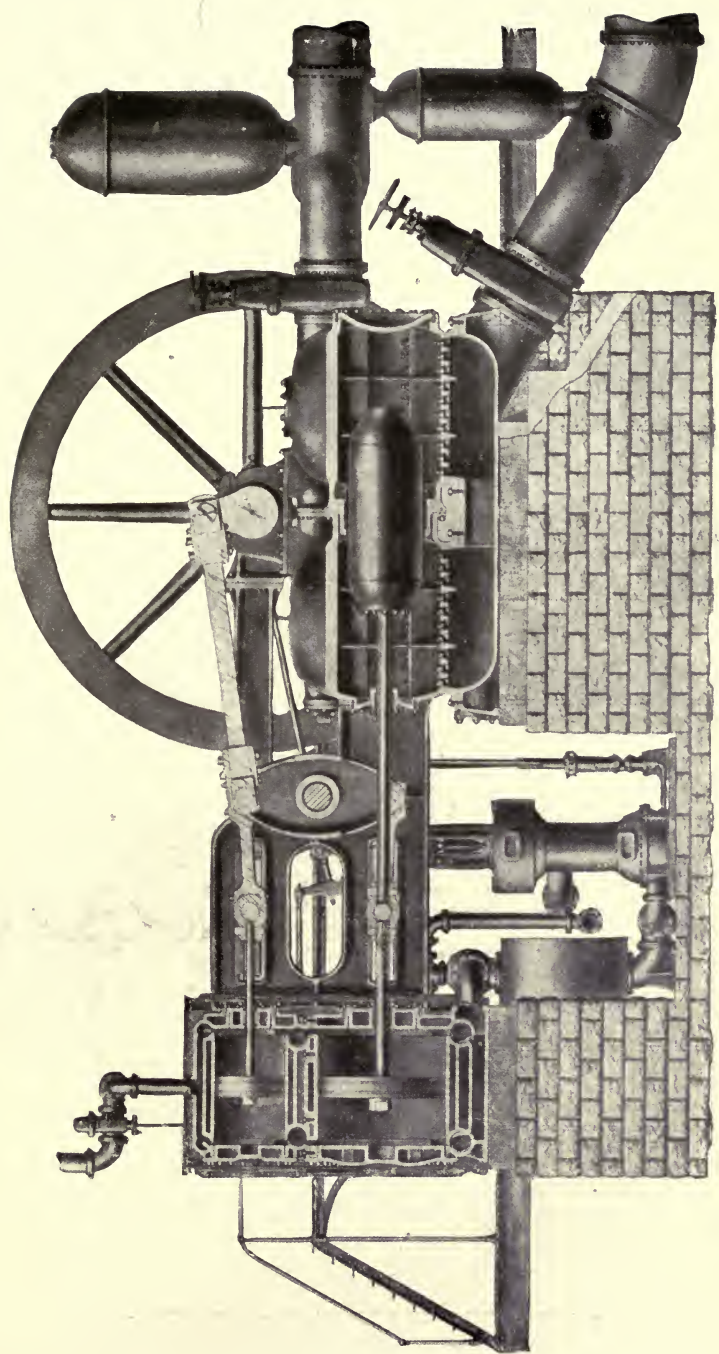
Framing of Later Gaskill Pumping Engine.
